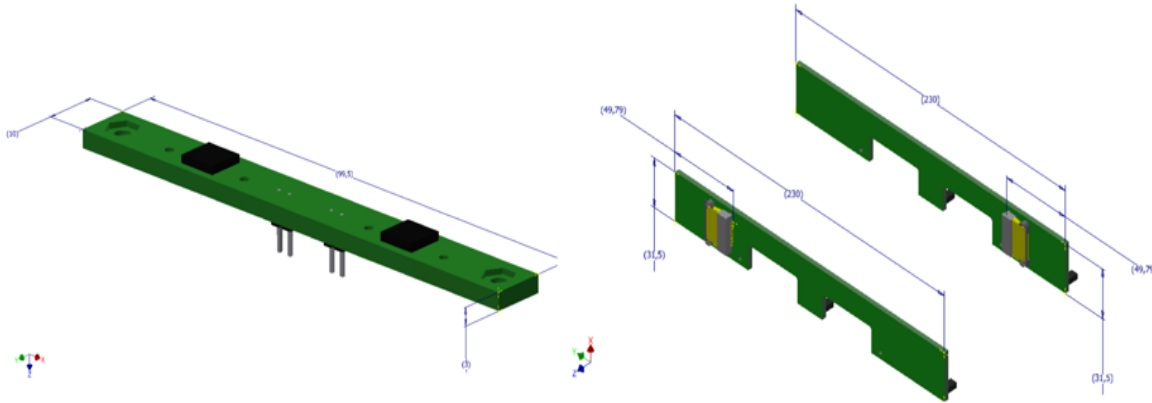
m.6. General view of the SiPM PCB and the E-PCB.
